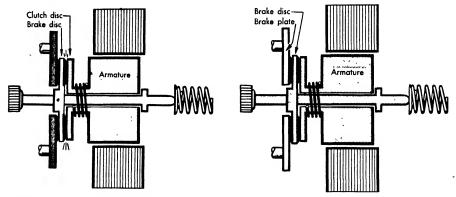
A schematic drawing to show the clutch and brake mechanism. (Courtesy Minneapolis-Honeywell Regulator Company)
